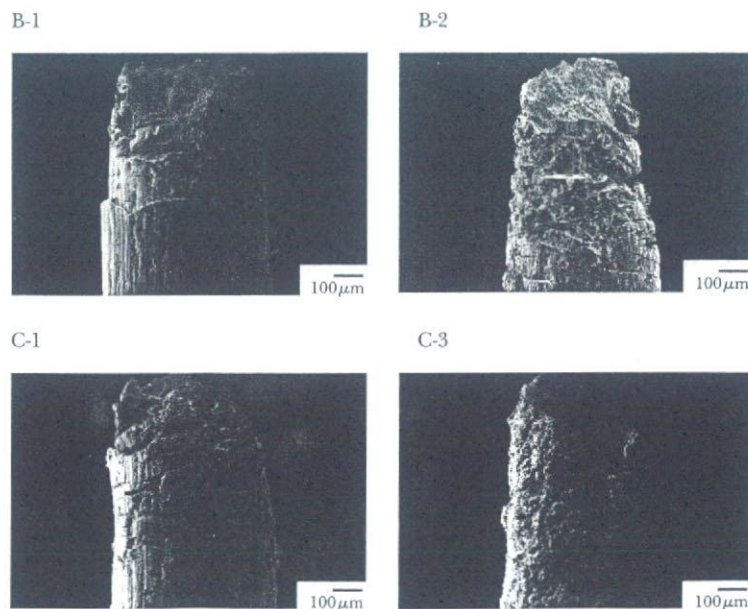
Fractured surface of specimens after tensile test for each specimen shown in Fig. 2
